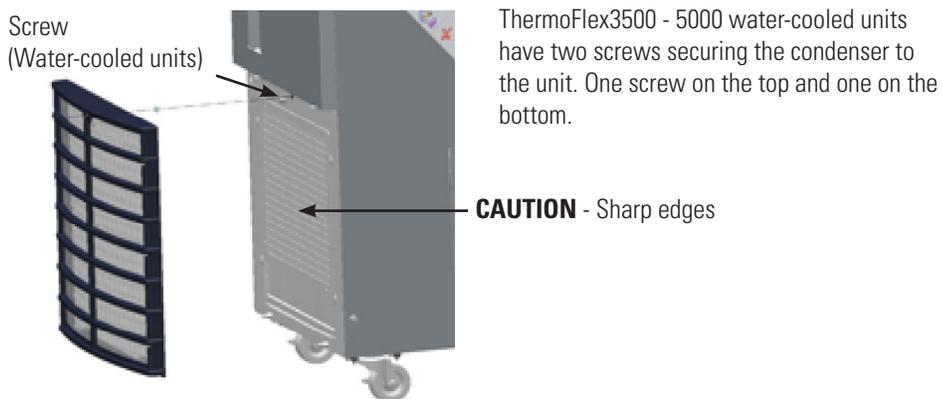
ThermoFlex900 - 5000 Condenser Grill Removal
